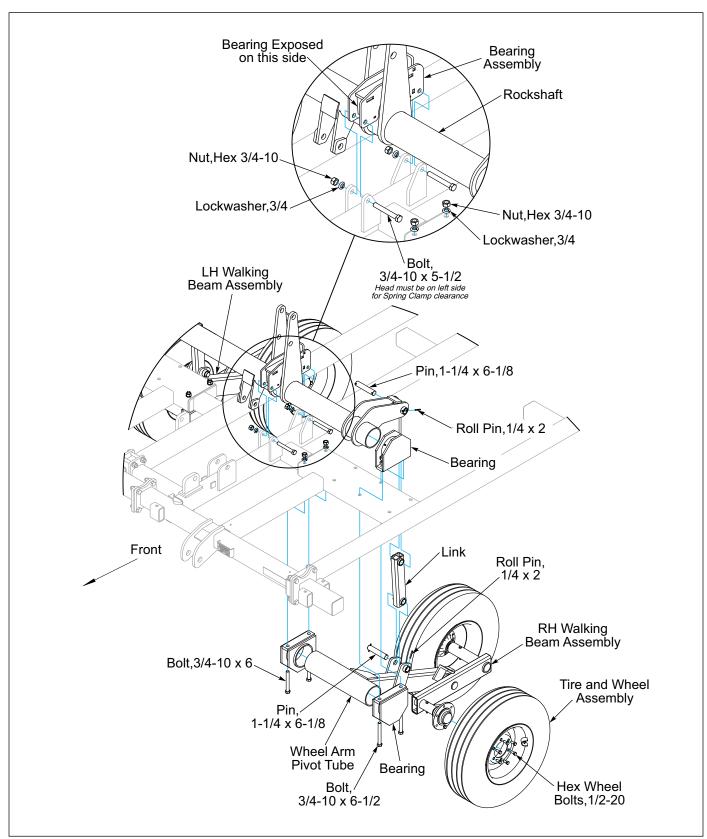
Tandem Wheel Transport Axle Assembly 9 Shank Models
